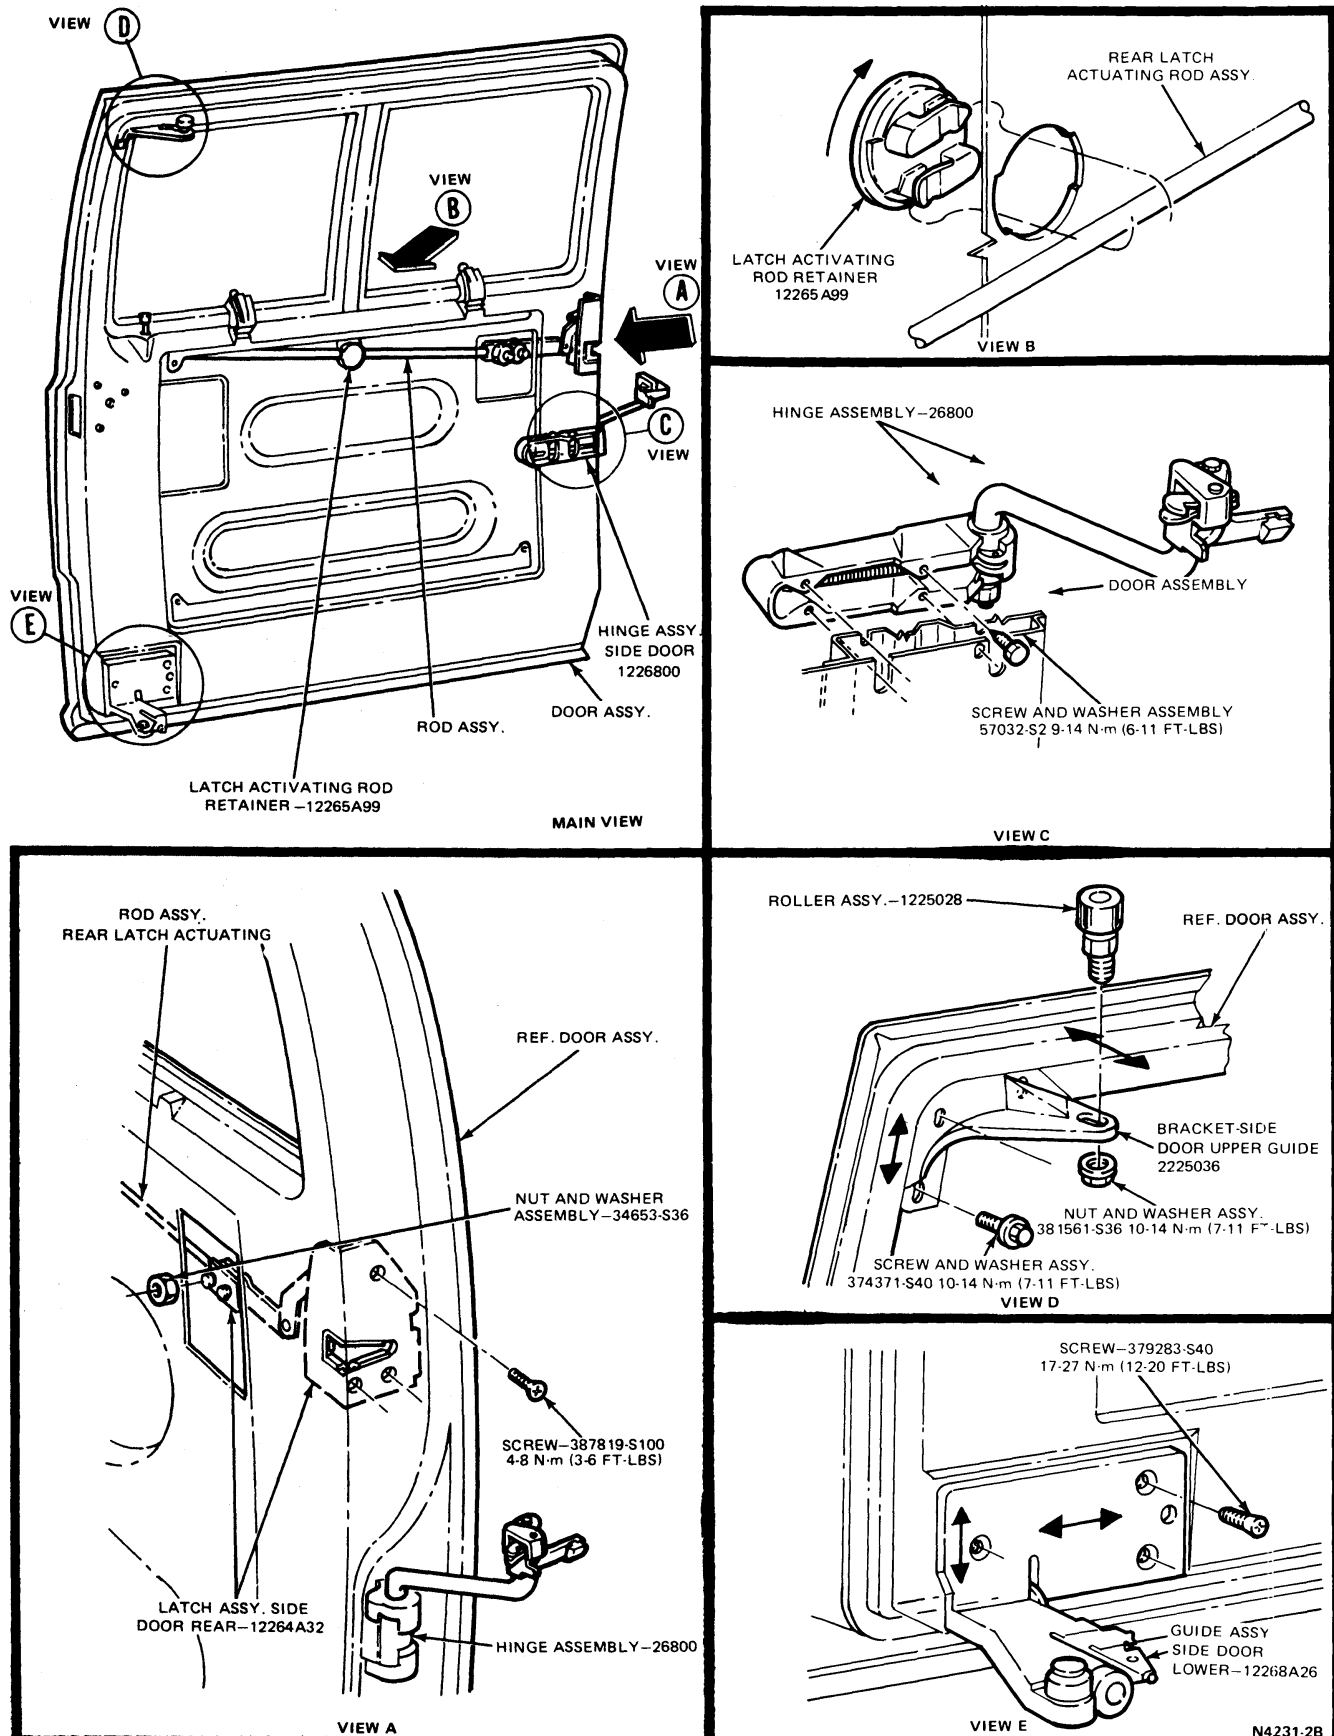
Sliding Door Adjustments—In or Out or Up or Down
